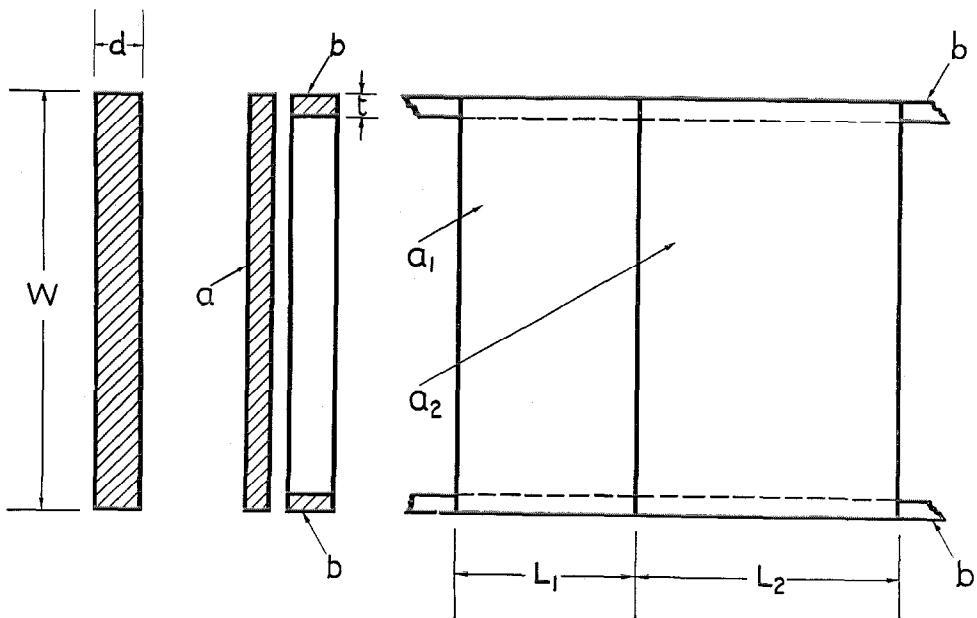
Universal Type of Mounting Plate, Illustrating the Problem Requiring Solution.
